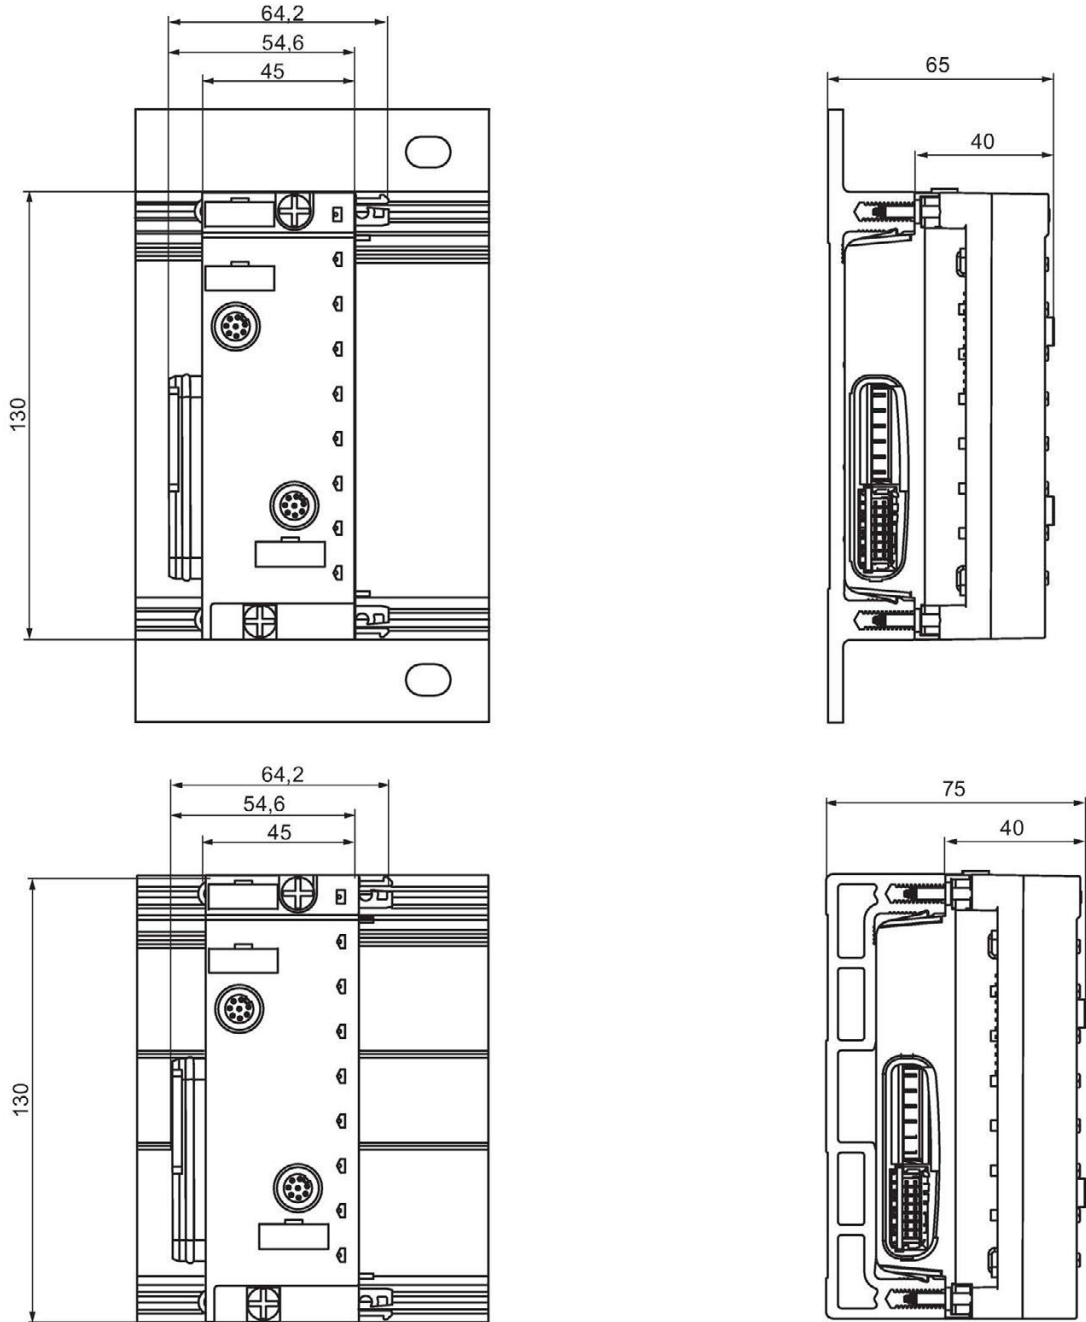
Dimension drawing of electronic module with CM IO 2xM12 connection module
